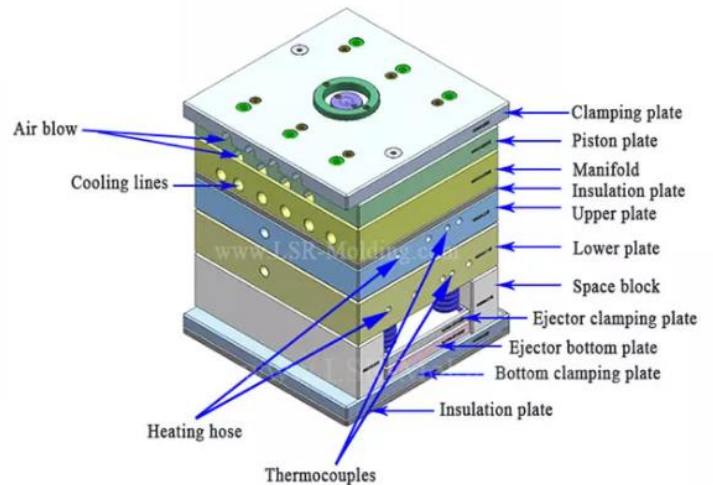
Mold assembly (Needle valve cold flow channel, n.d.)
